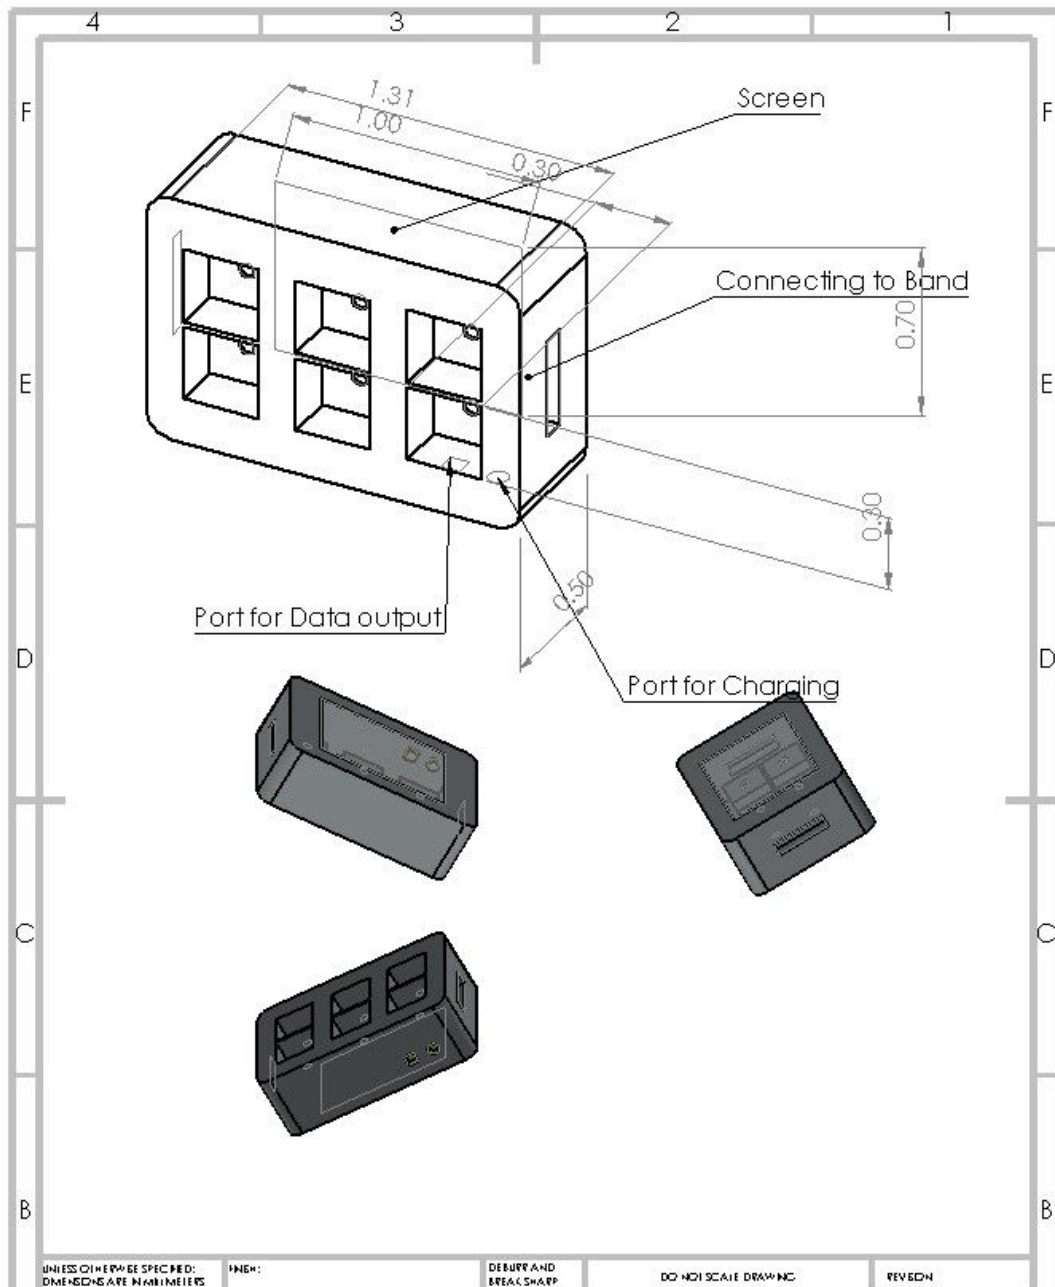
Housing Assembly with Dimensions Labelled in Inches
